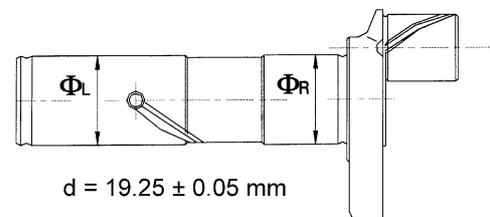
Crank shaft and dimensions to be controlled after the turning operation.
